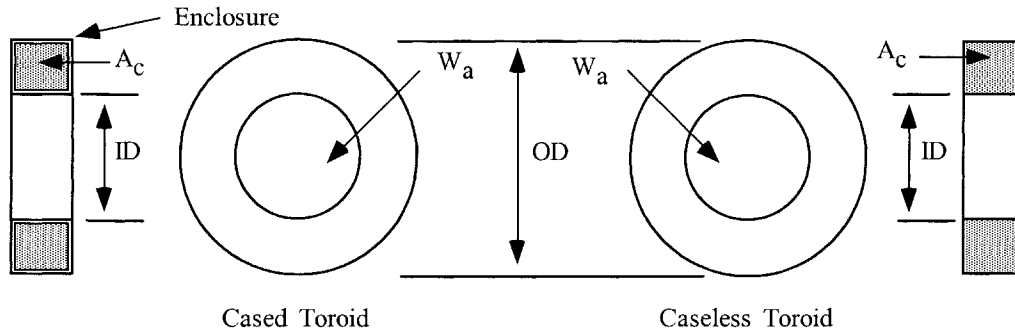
Tape Toroidal Core Dimensional Outline.
